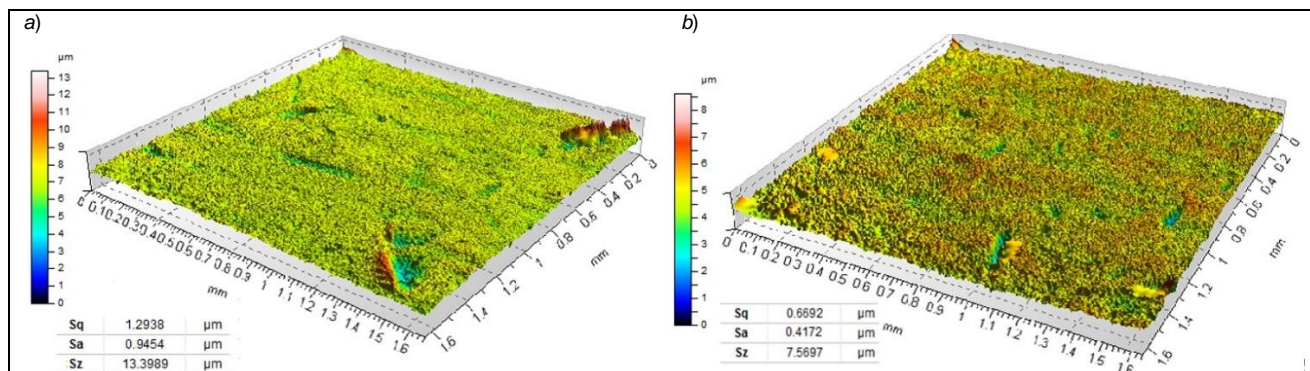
Geometric structure of the 3D surfaces of the elements: a) before vibratory machining, b) after 120 min of vibratory machining
